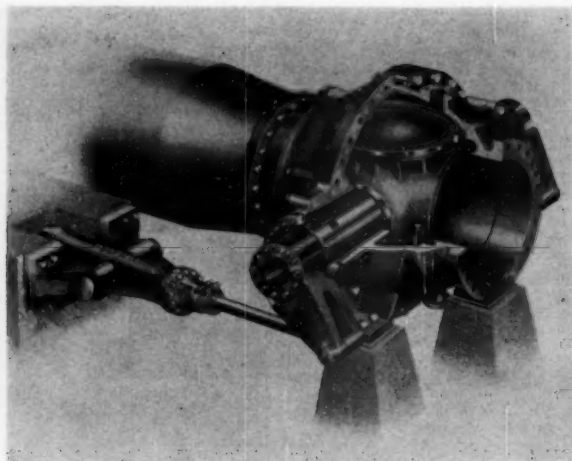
54-IN. SPHERICAL VALVE IN OPEN POSITION
